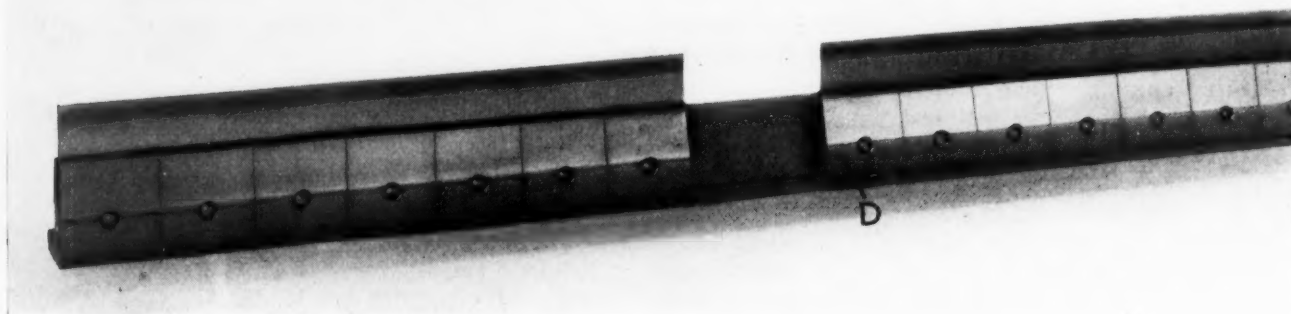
One Hundred and Sixty-eight Parts D, 2 Inches Long, Cut from Stock D, Fig. 6, are Used on One Machine
